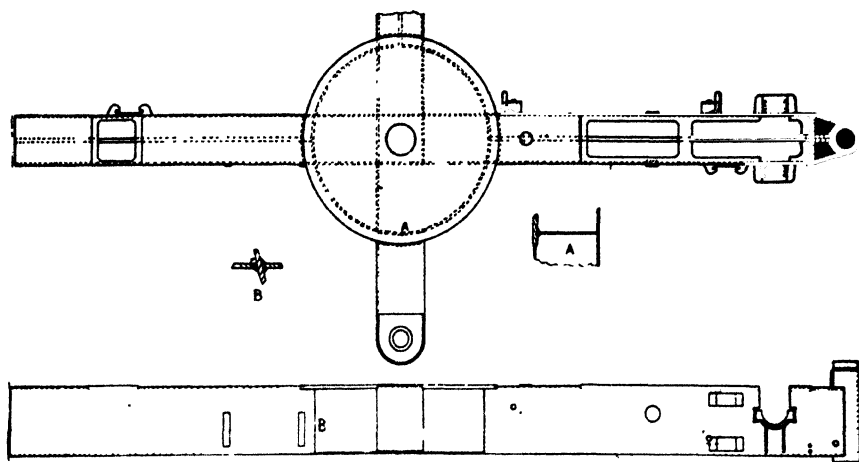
Line drawings indicating the simplification that has resulted from the employment of welded construction on the main body of the chassis.
